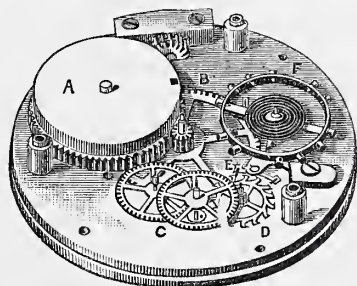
American Lever Waltham with Top Plate Removed—A, Barrel; B, Centre Wheel; C, Third and Fourth Wheels; D, Escape Wheel; E, Lever; F, Compensation Balance.
